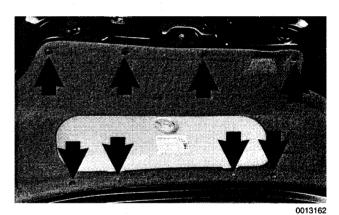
Trunk lid trim and tool kit retaining screws and clips (arrows).
